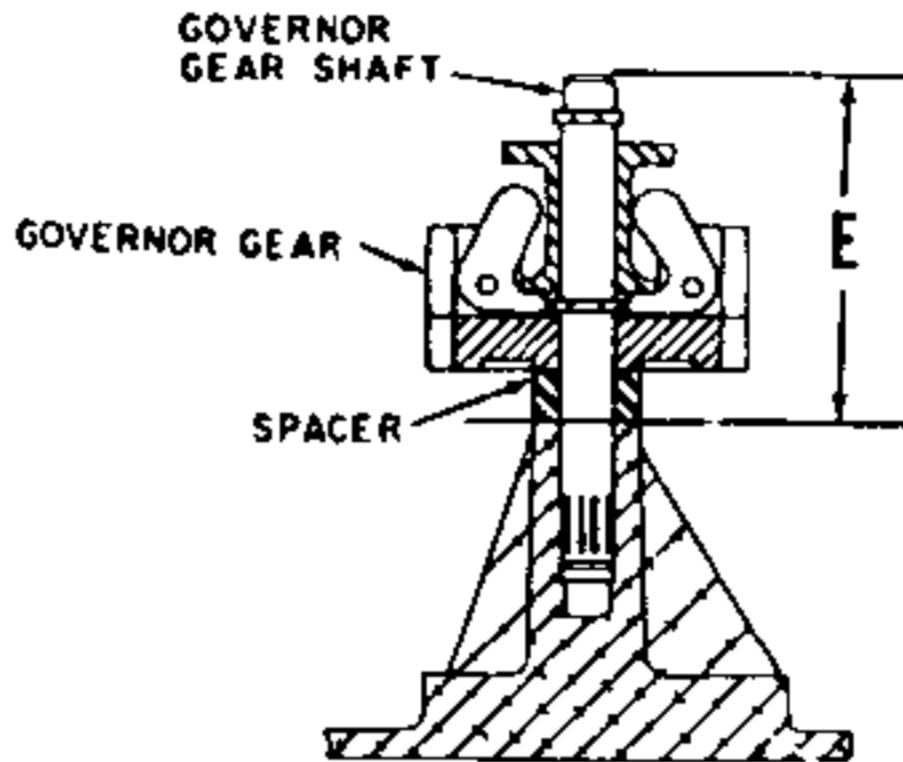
Governor gear and shaft installation on Models VH70, VM70, VM80 and VM100. Dimension (E) is 1- $\frac{19}{32}$ inches (40.5 mm).
